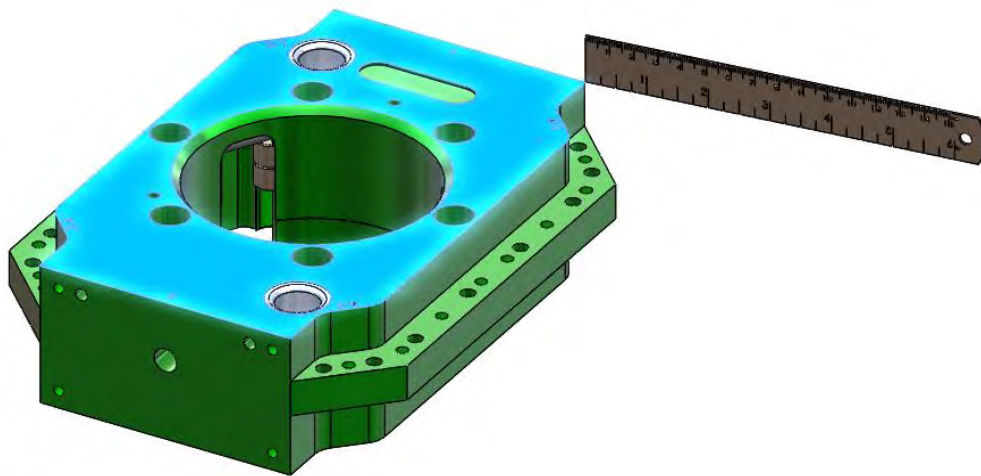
Tool Adaptor – Raised Material Inspection
